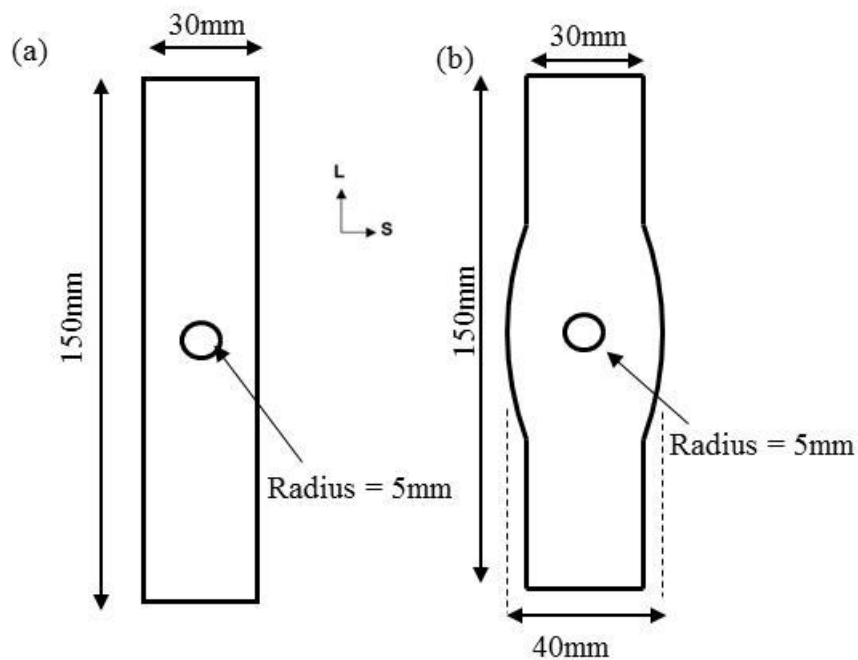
Schematic view of the open hole sample designs: (a) Open hole sample and (b) Modified open hole sample
